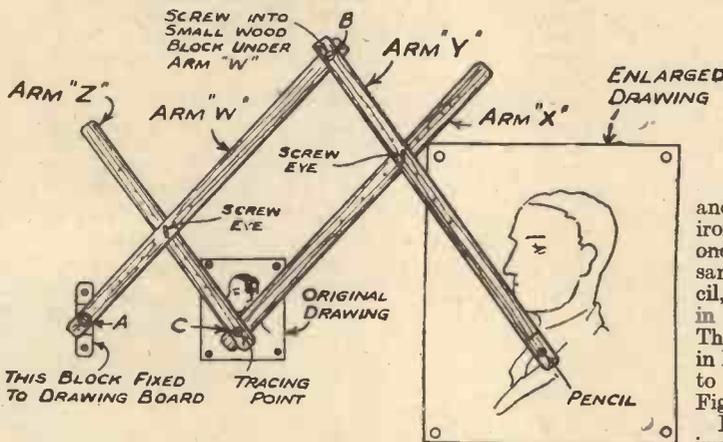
The pantagraph completed. The assembling of the parts is shown in this diagram.
